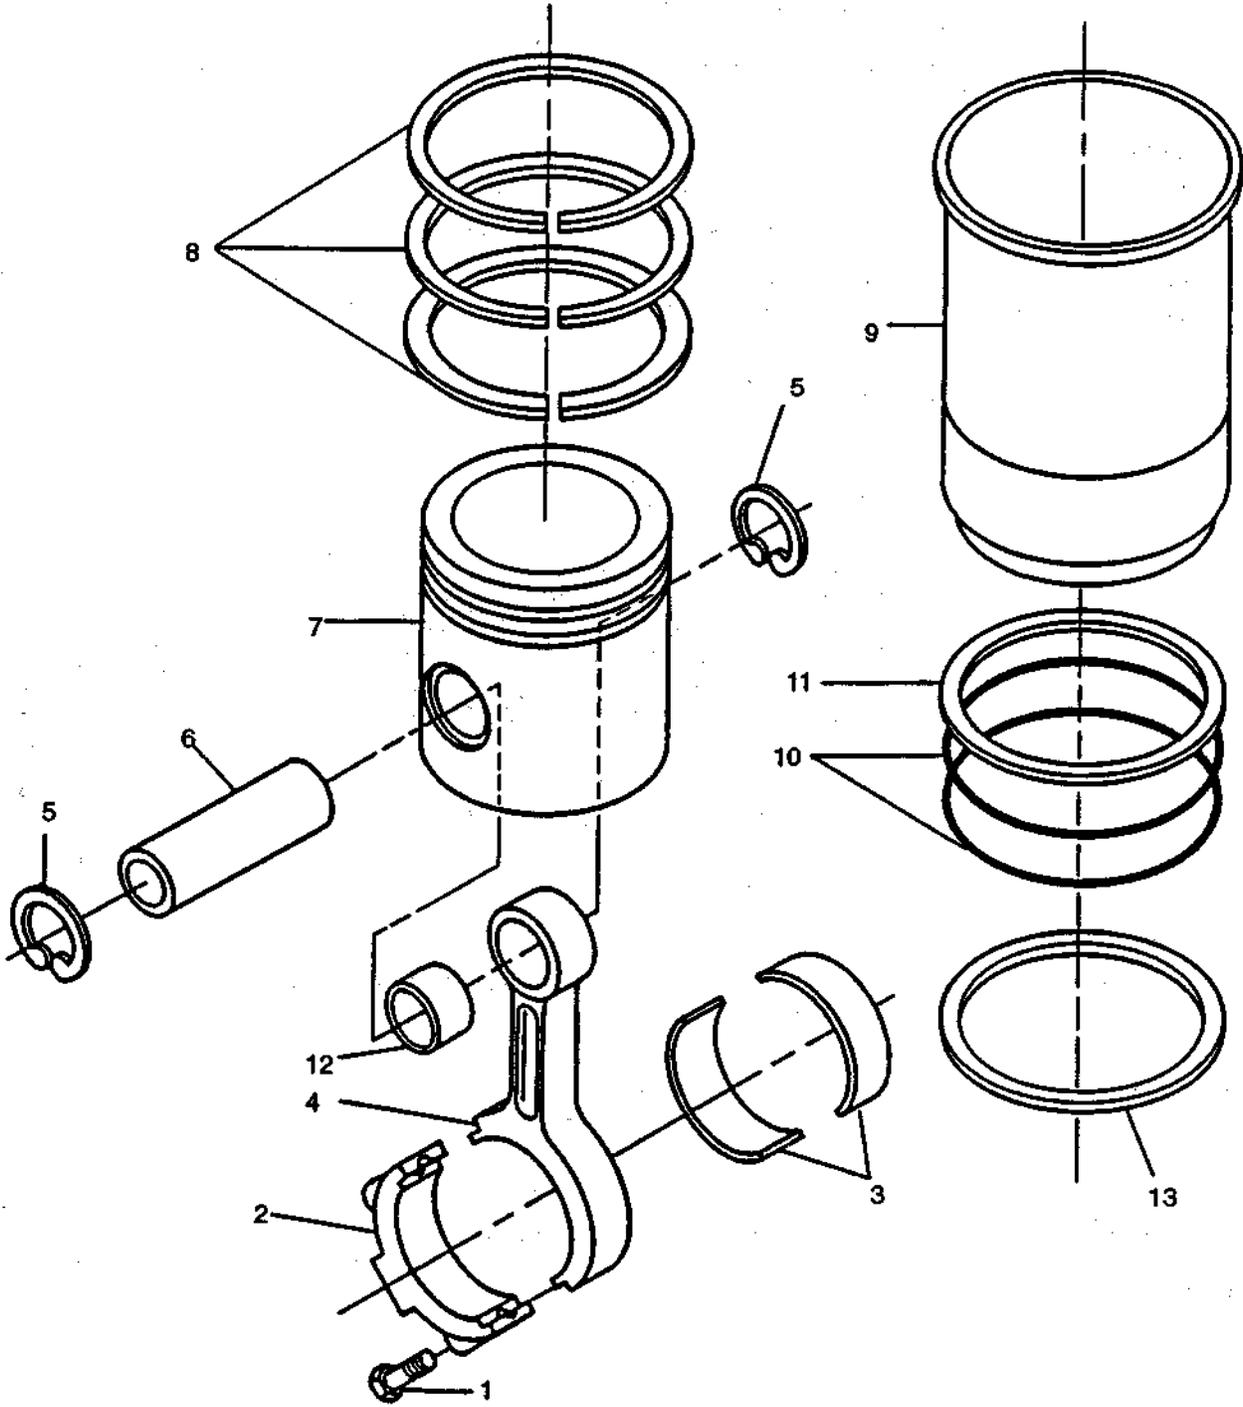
Pistons, Connecting Rods, and Cylinder Liners
